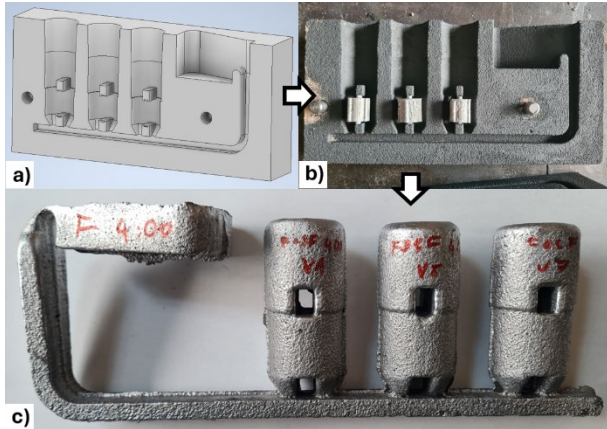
Process of overcasting: a) CAD model, b) mold with fixed foam cores, c) three samples of hybrid casting
